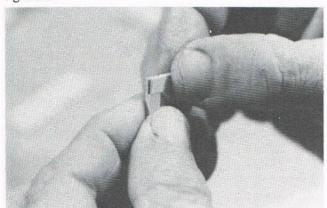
When well done, the front and back surfaces of the boards will be flush, the joint lines clean and the corner square.
